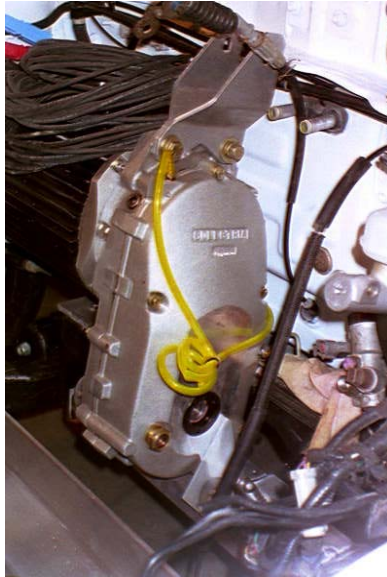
Side view of Solectria electric motor and gearbox installed in the Genesis.
